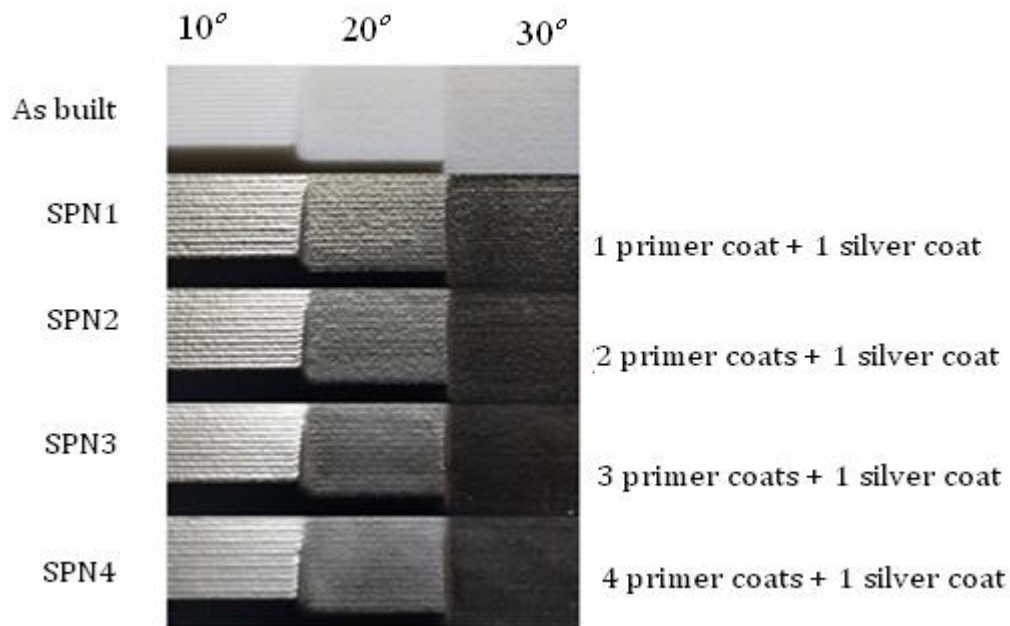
Improvement of surface finish of nylon test pieces by spray painting technique
